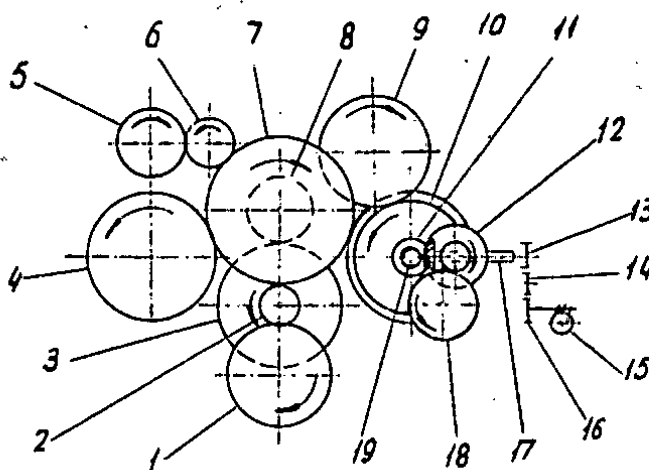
Diagram of accessory drives mounted in supercharger rear housing and on the crankcase rear cover.
